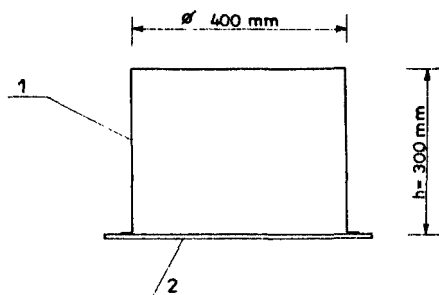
DIMENSIONAL SKETCH OF CONTAINER FOR MODEL TESTS - CONFIGURATION NO. 2
